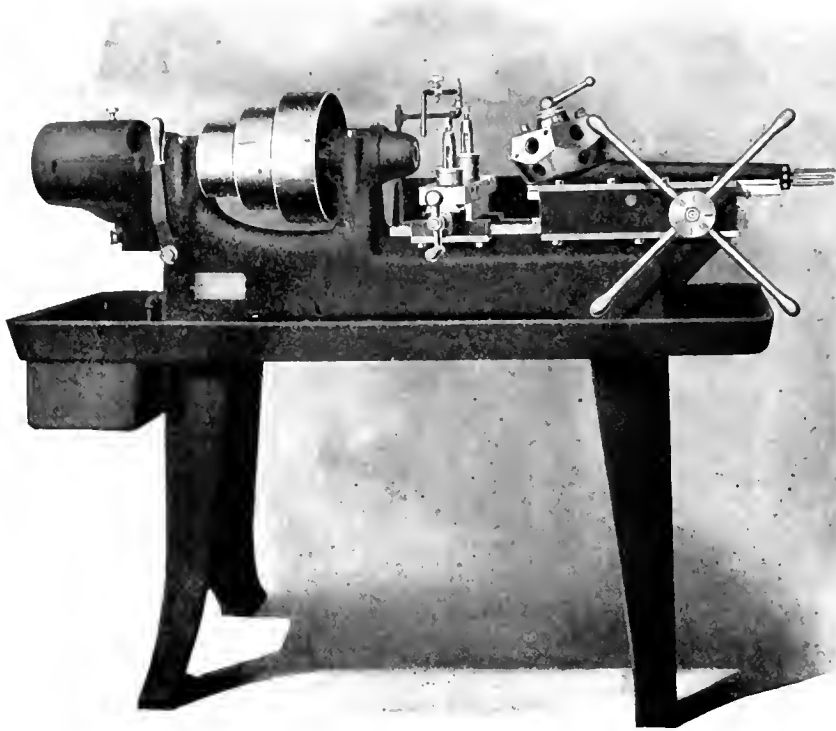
The No. 3, 1 1/4 inch Complete Screw Machine
